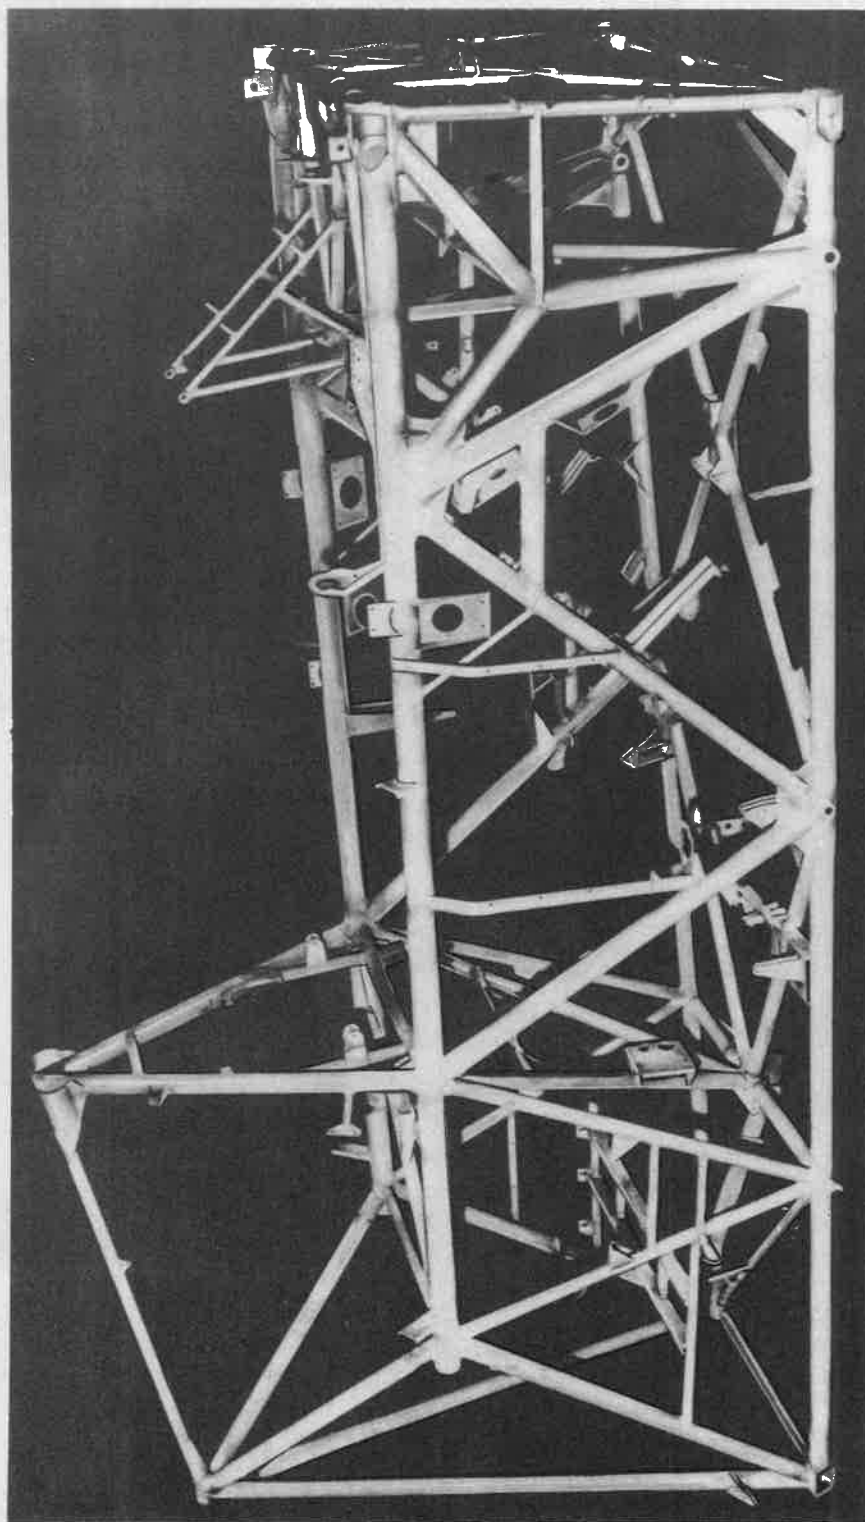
FUSELAGE STEEL TUBE STRUCTURE ASSEMBLY
